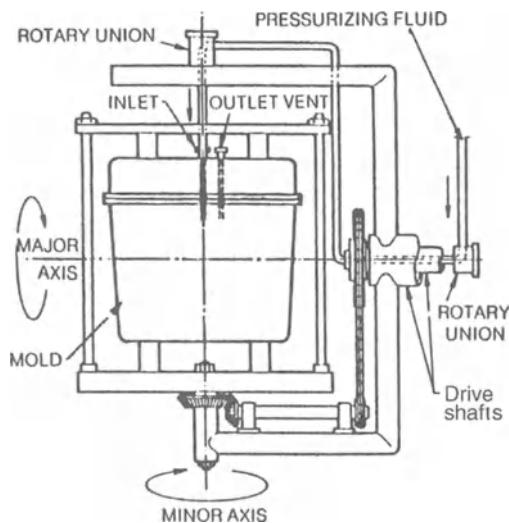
Schematic showing feeding inlet to form a hollow product inside a closed mold while the mold is being biaxially rotated. This system permits molding multiplastic layers of different materials (corotational molding).
